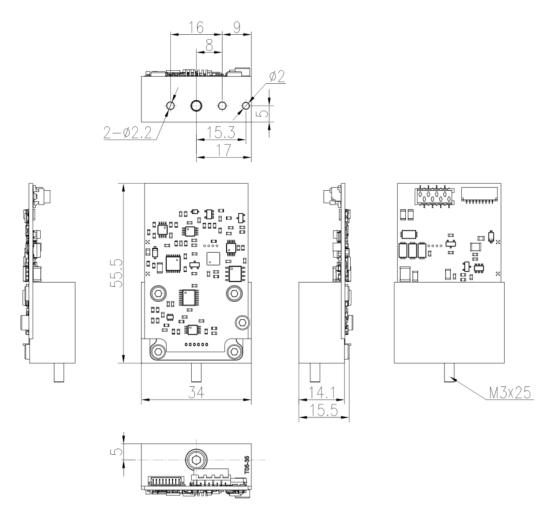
PFLOW5001 (up to 3 SLPM) manifold mechanical dimensions.
